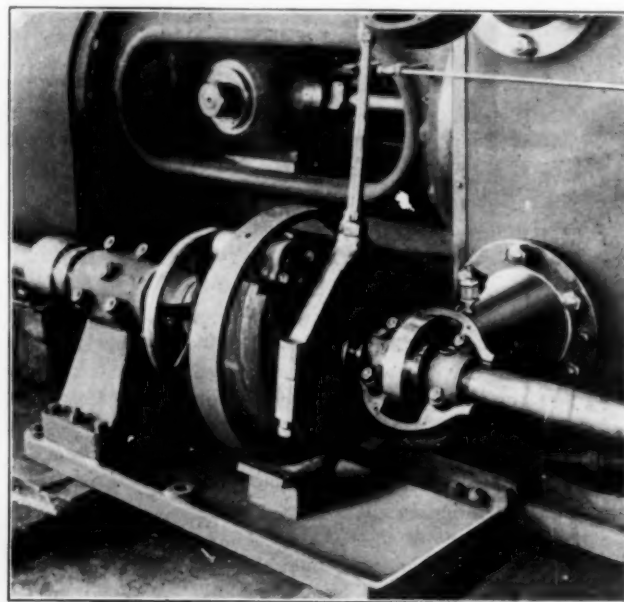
VALVE GEAR, GOVERNOR AND HAND SPEED ADJUSTMENT
